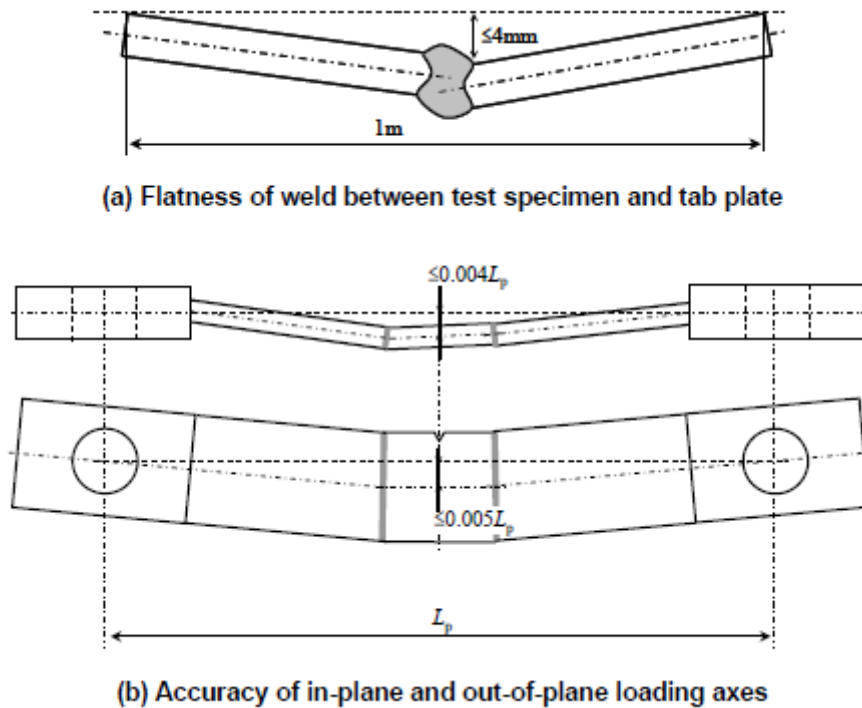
Dimensional accuracy of weld between test specimen and tab plate
